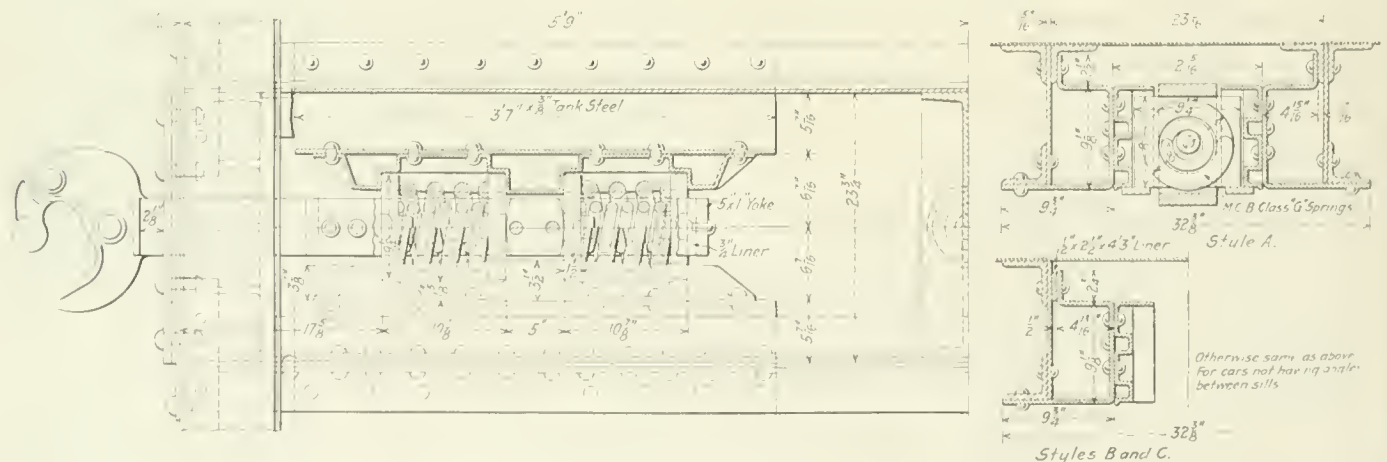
Application of Tandem Spring Draft Gear on Center Sills with Wide Spacing
